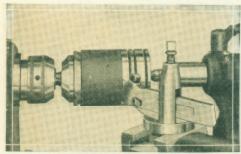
Turning a Semi-machined Piston Mounted on a No. 44 Piston Adapter. See page 9
